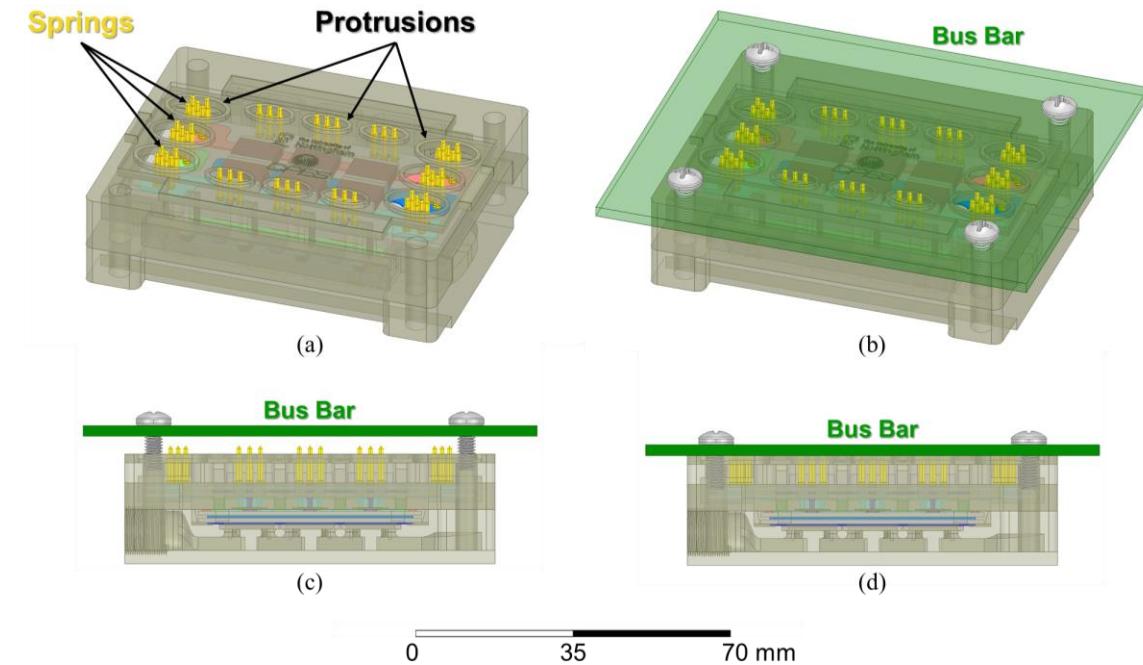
3D model of the (a) module with the housing and lid, (b) module with the bus bar, (c) side view of the module, and (d) side view of the module with the bus bar compressing the spring terminals.
